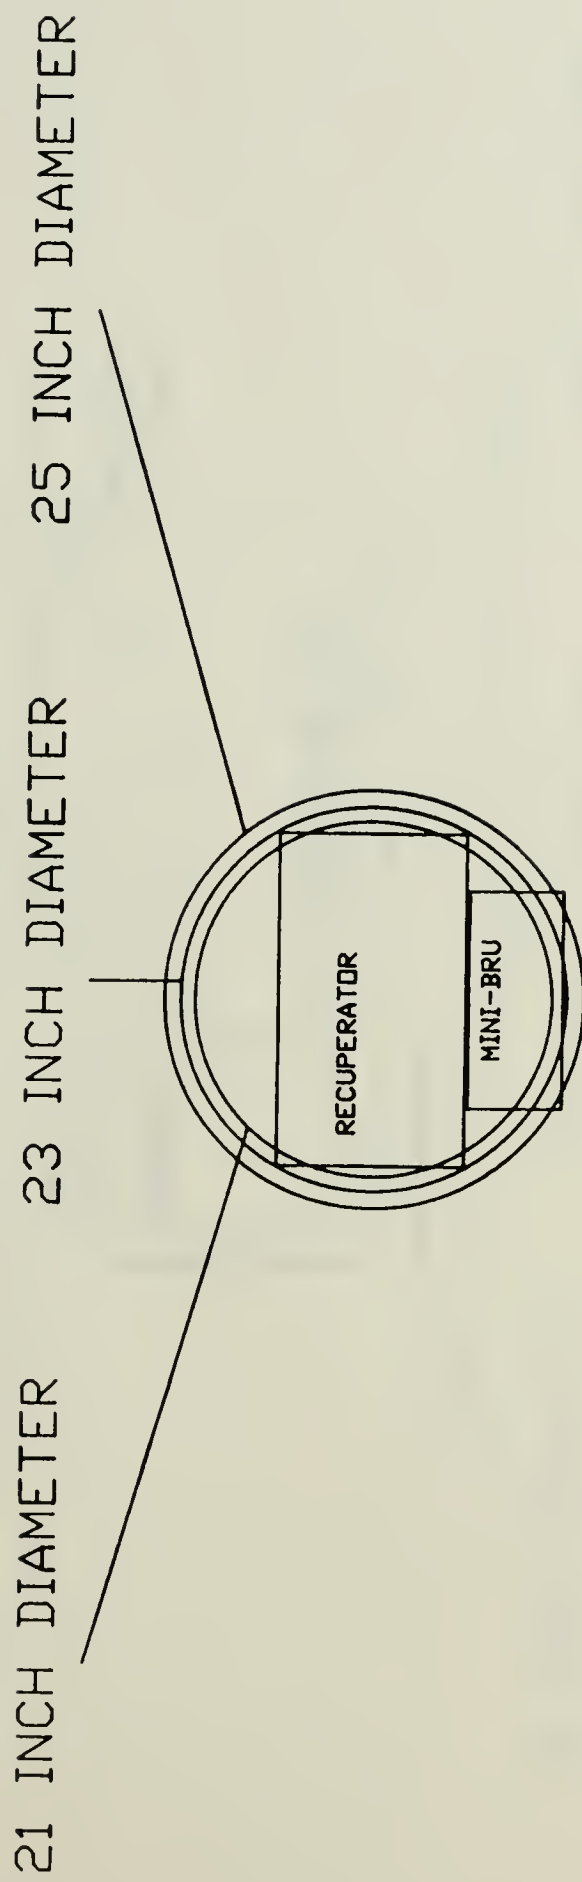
CROSS-SECTIONAL VIEW OF A 25 INCH DIAMETER VEHICLE
